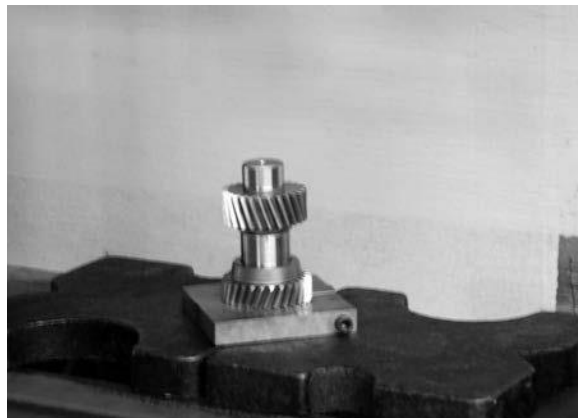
| PRESSING 5TH COUNTER GEAR ONTO THE F6R COUNTERSHAFT
